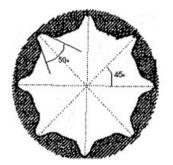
shows a horizontal cut of the Sunndal stub hole design. (Standard screwed stub hole)
